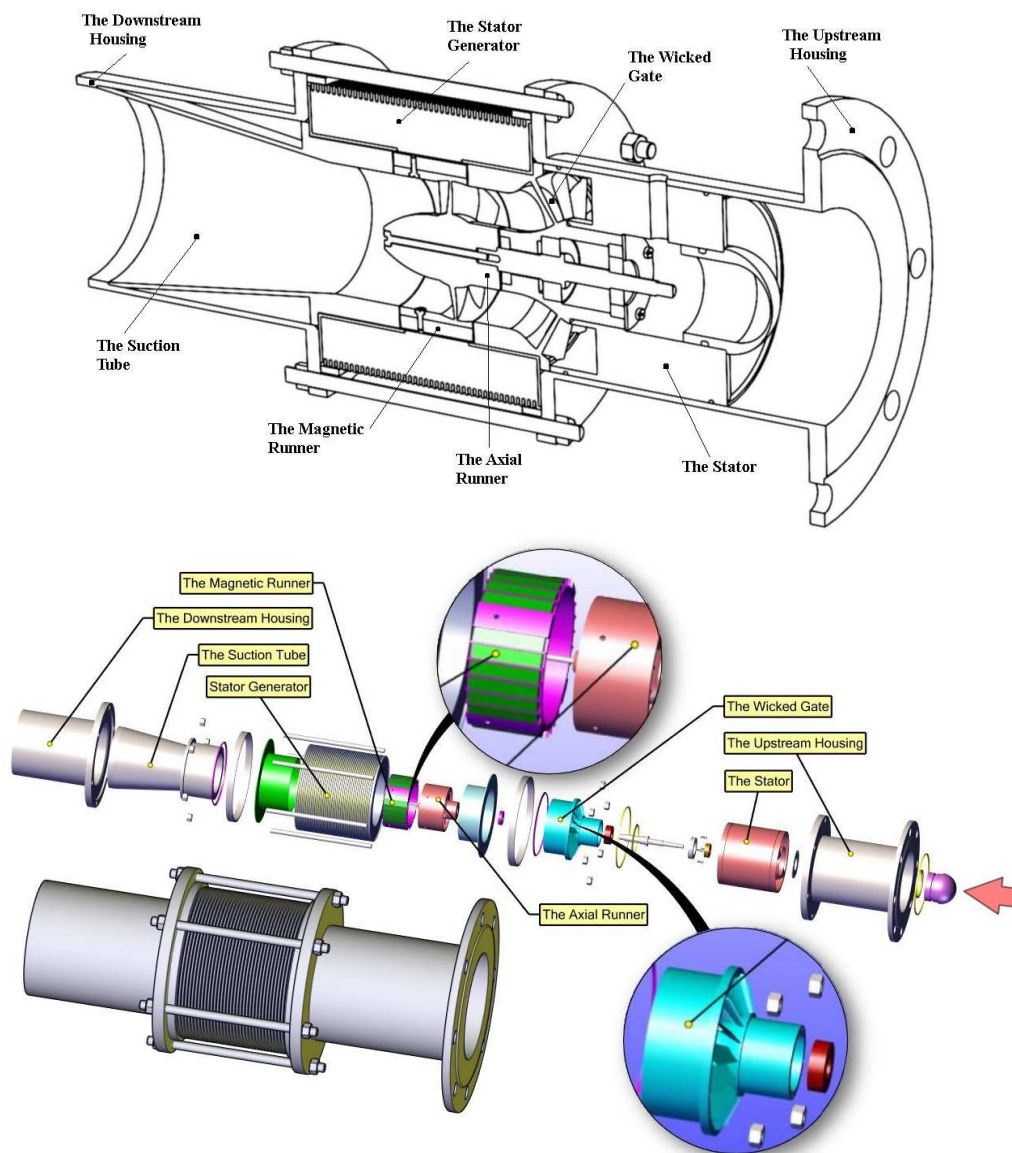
The constructive solution of the microturbine (section and exploded views)
